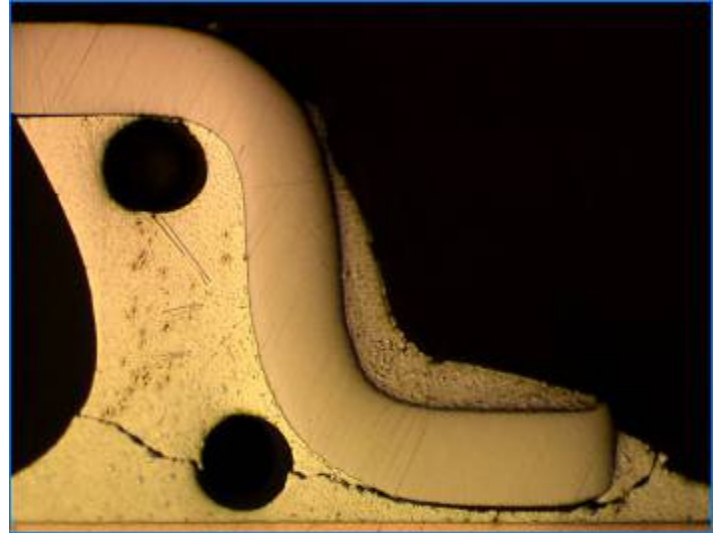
cross section, SN66, U62, right lead solder crack and void, 100x
